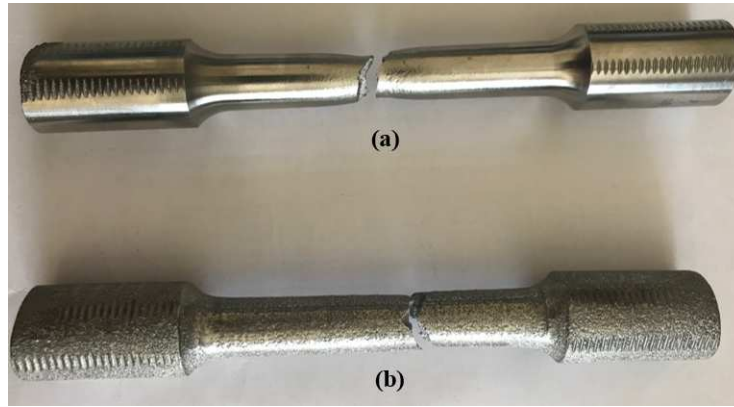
Visuals of (a) machined X specimen (b) one of the as-built Z specimens after tensile test
